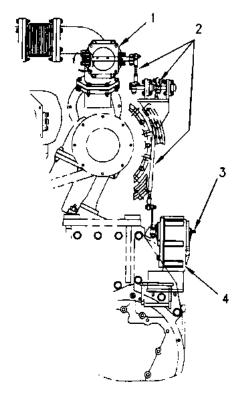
(1) Exhaust bypass valve. (2) Adjustable linkage.(3) Actuator indicator. (4) Exhaust bypass actuator.
